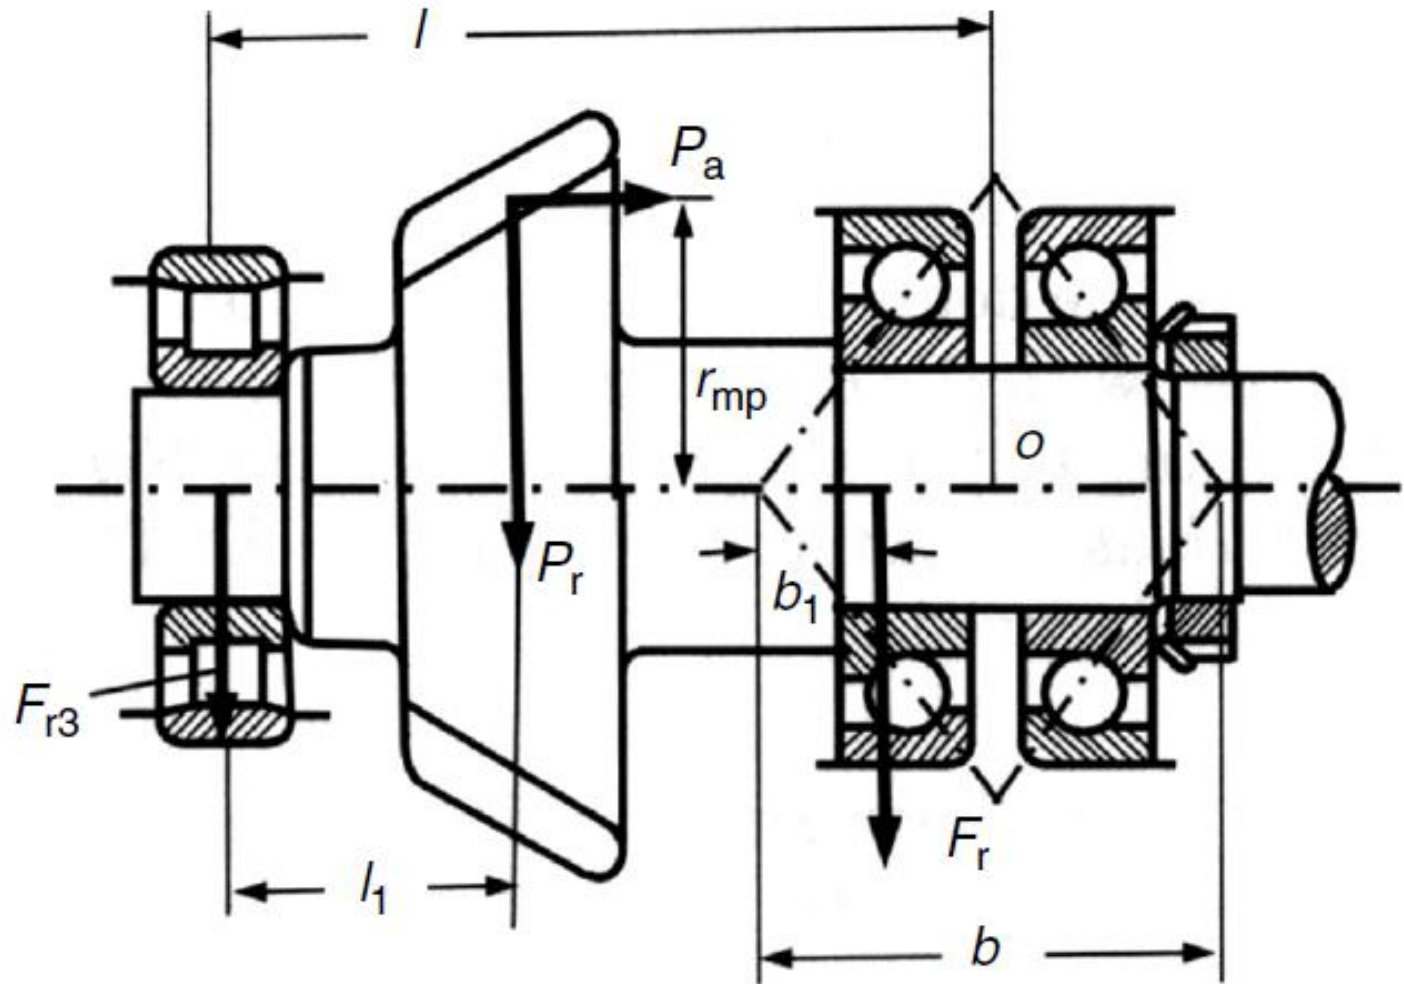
Example of three-bearing shaft system with a rigid shaft.
